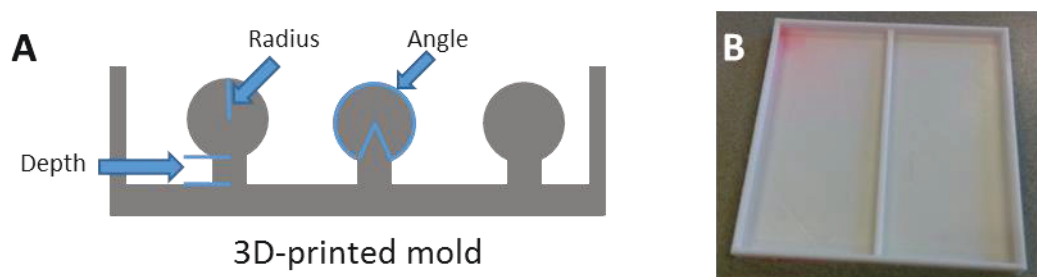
A) Schematic overview of the varied depth (0-0.8 mm), radius (100% - 70% of the OD of the tubing) and angle (180° - 300°) in the 3D printed moulds, B) 3D printed mould (depth: 0.5 mm; radius: 95%; angle: 300°) to produce the desired PDMS plates
